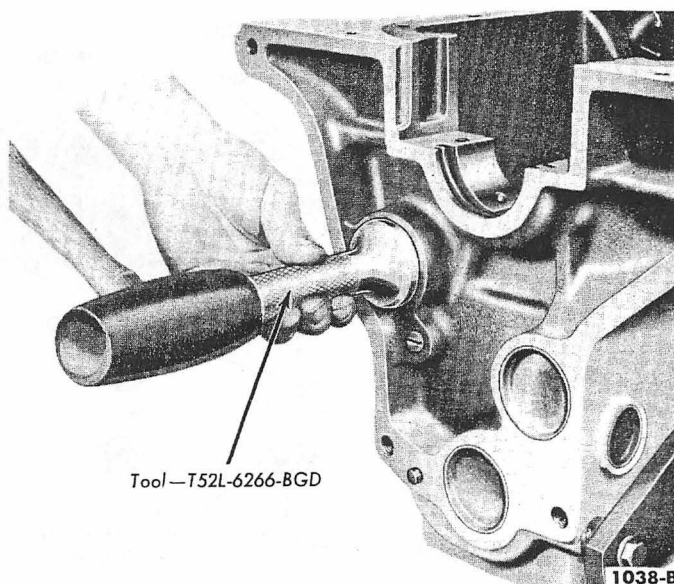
Camshaft Rear Bearing Bore Plug Installation
